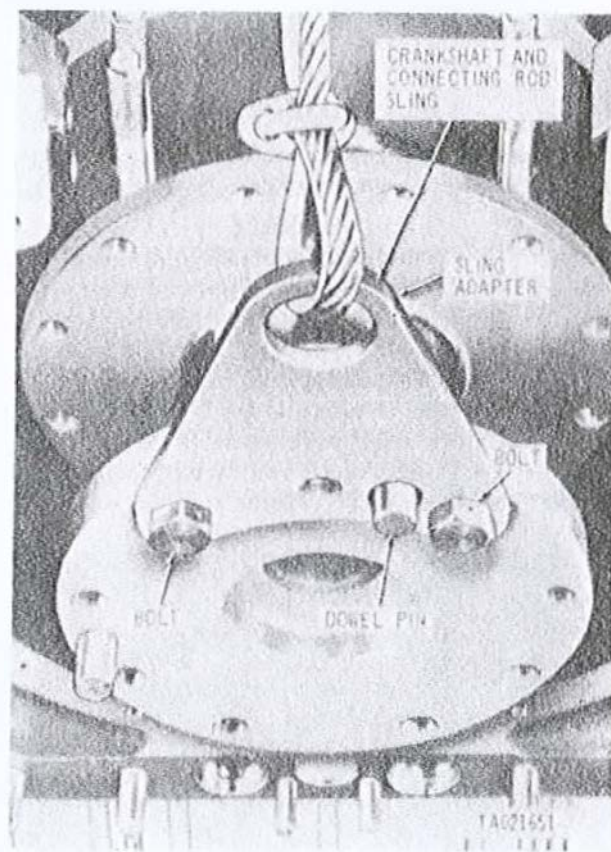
Installing or removing crankshaft and connecting rod sling at crankshaft flywheel flange.
